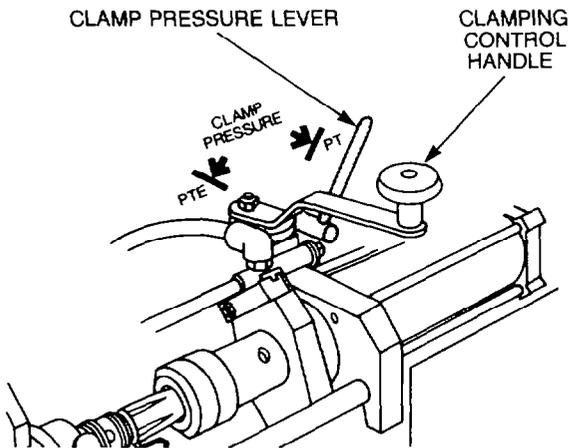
Clamp Pressure Lever and Clamping Control Handle — Locked Position
